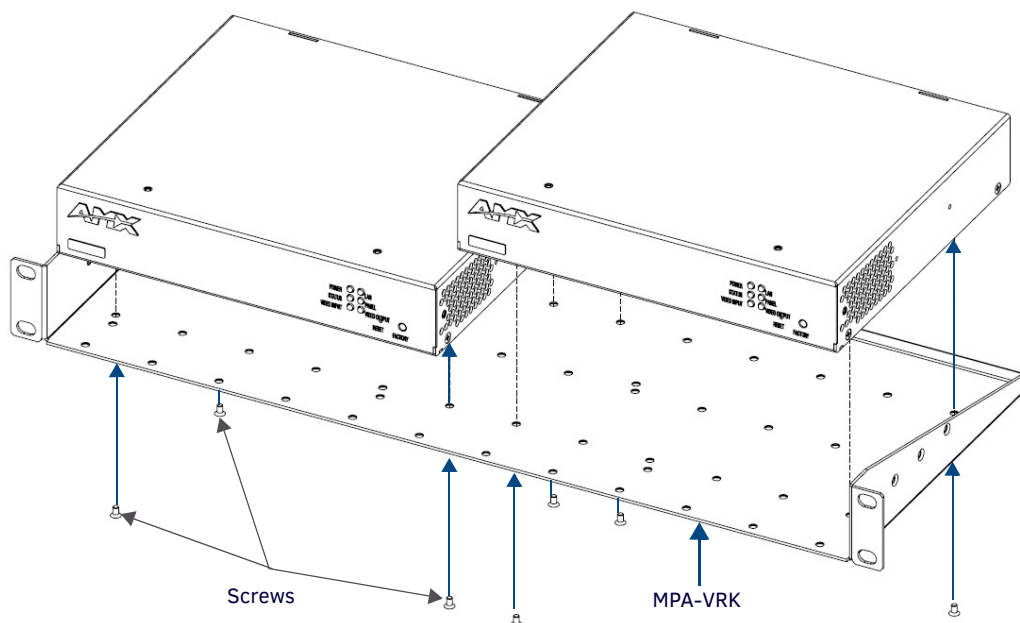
Installing two MXA-MP devices in a Rack Mounting Tray
